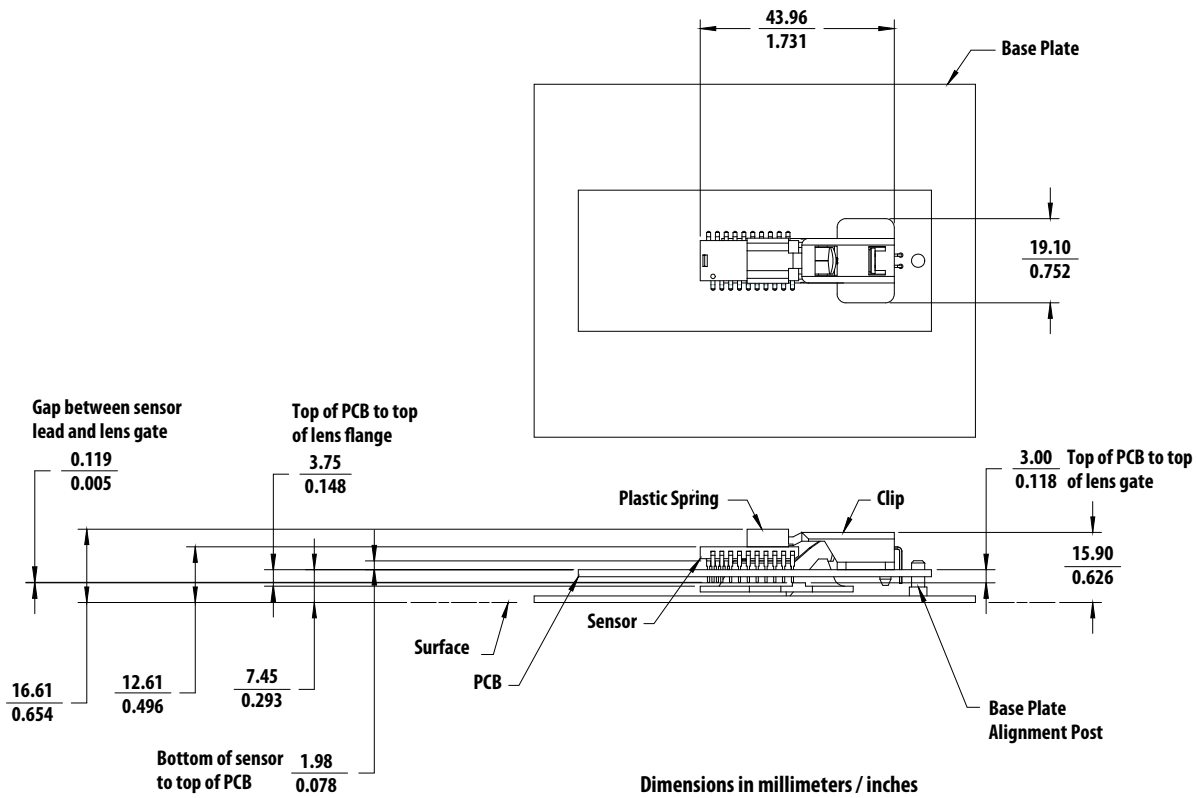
2D Assembly drawing of ADNS-3080 (top and side view)
